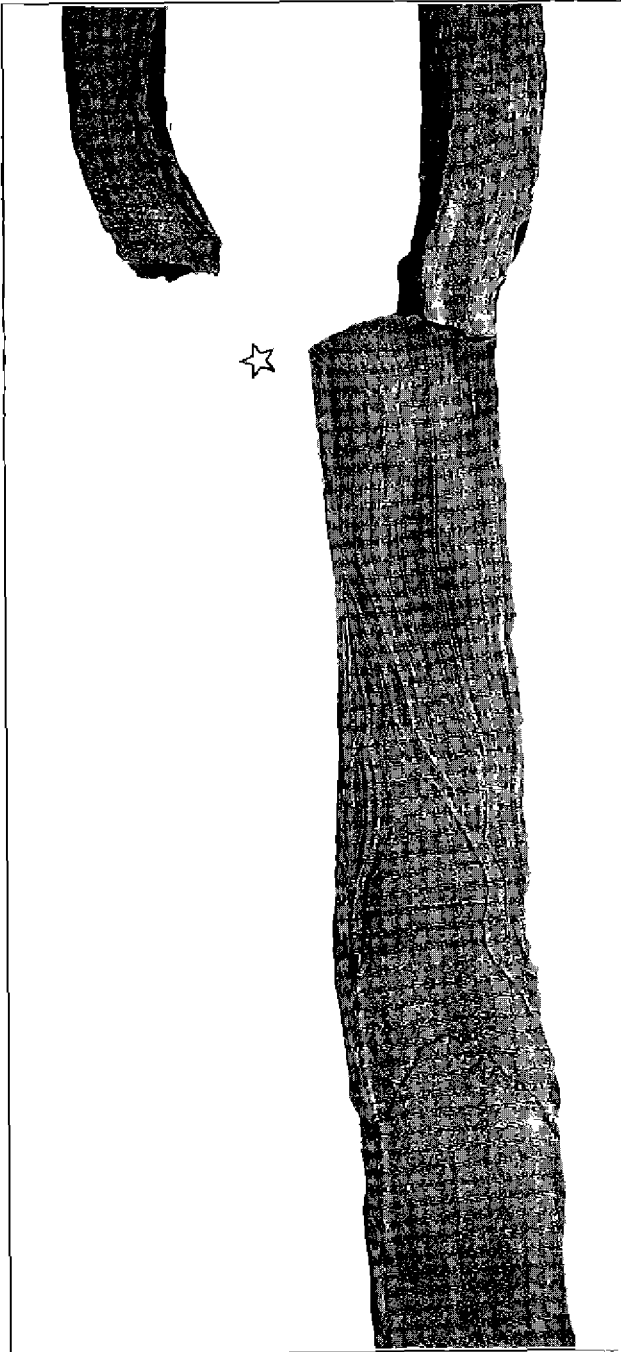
View showing welds in hanger and distortion of the fibers of the iron at incipient point of fracture. Star on cut indicates the place where fracture began.
